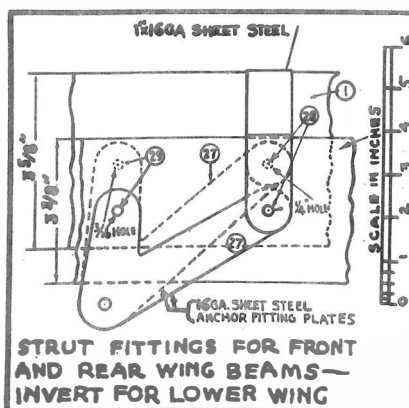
A drawing of the wing beam strut fittings. Eight will be used in the construction.
